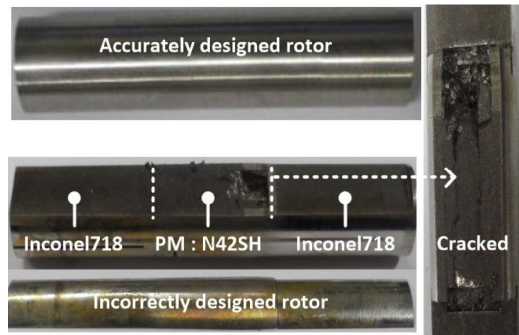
Broken rotor caused by an incorrectly selected shrink fit [89].
